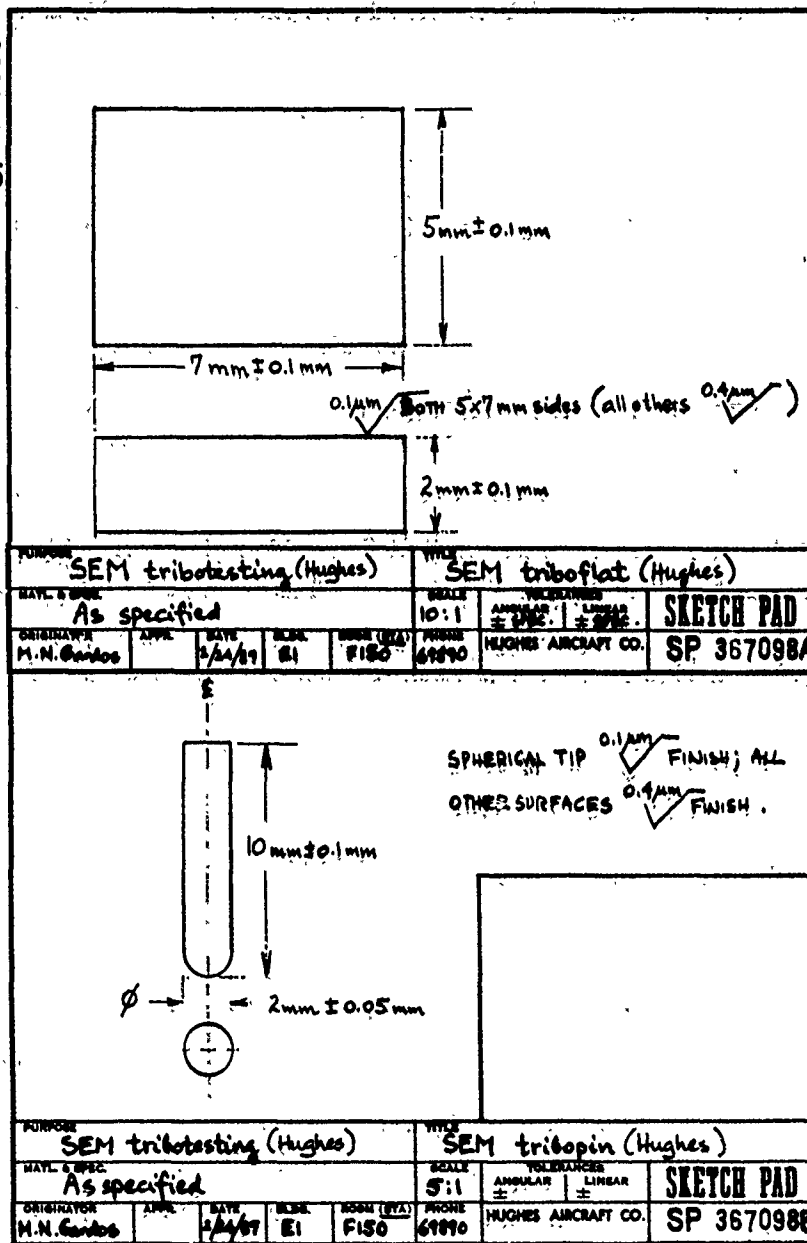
Engineering drawings of the HT-SEM pin and flat specimens.
